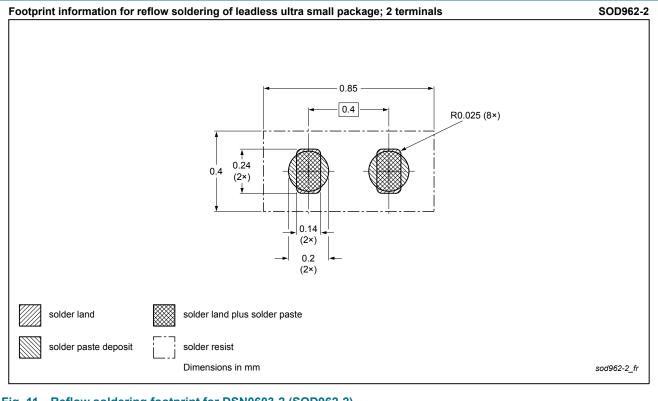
Reflow soldering footprint for DSN0603-2 (SOD962-2)
